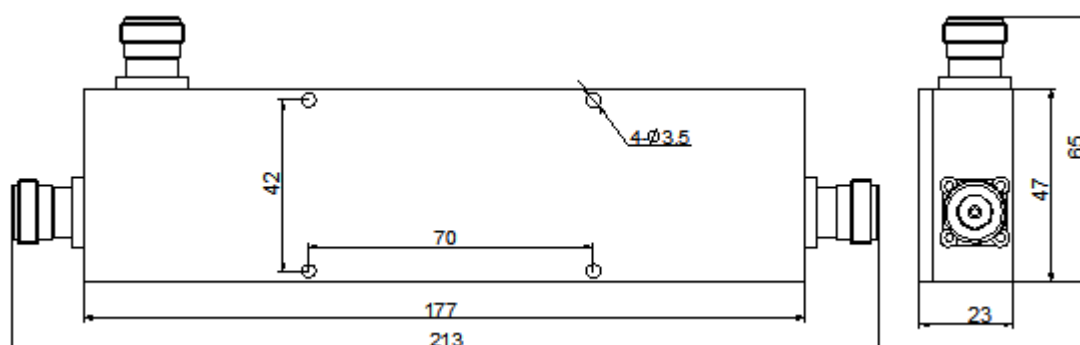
JX-DC-340M2700M-18Nx front panel layout
